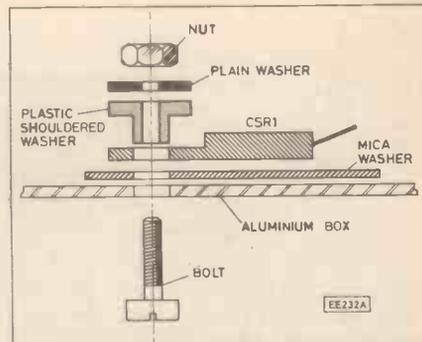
Method of fixing the thyristor (CSR1) on the case using the mounting kit.
